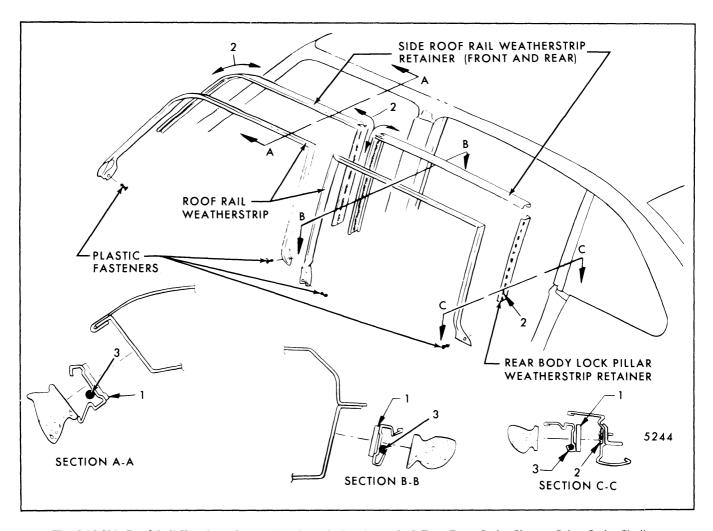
Side Roof Rail Weatherstrip and Weatherstrip Retainer - "A" Four-Door Styles Shown, Other Styles Similar
